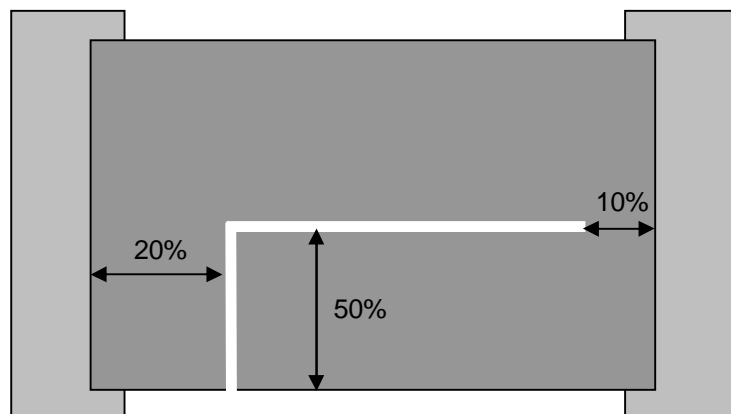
L cut trim pattern used in determining the optimum laser beam settings
